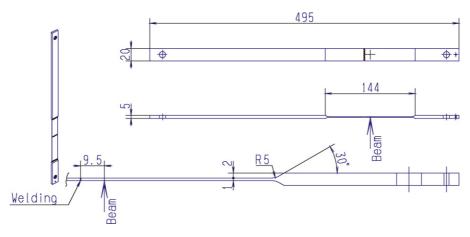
Nominal dimensions of the welded specimen.
